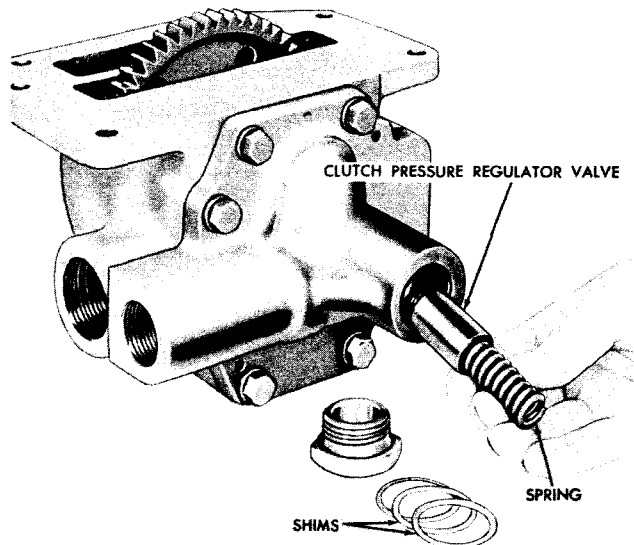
Removing (or installing) clutch pressure regulator valve
